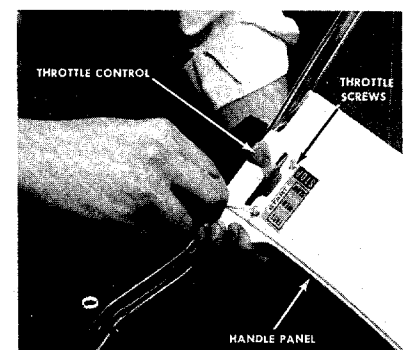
THROTTLE CONTROL ASSEMBLY
